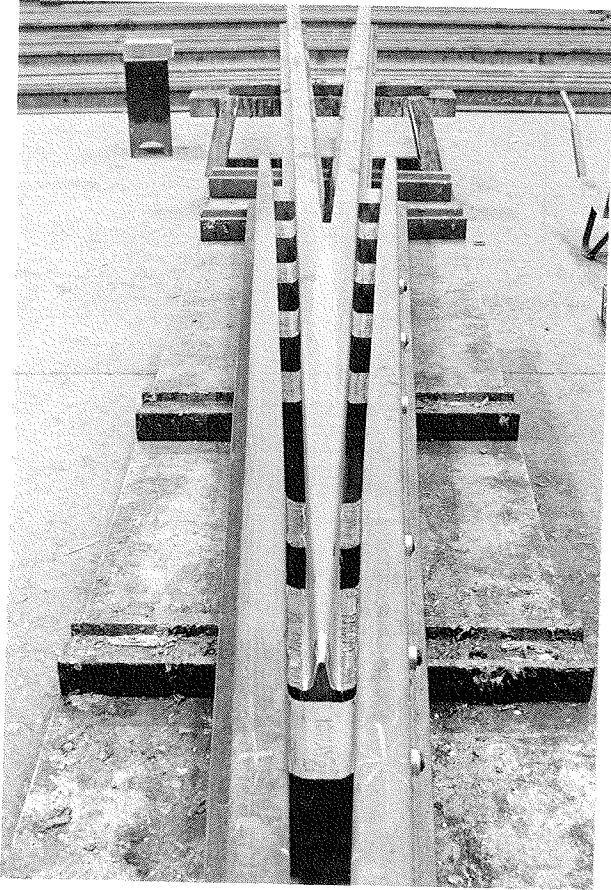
Part-welded crossing in BS.11 grade steel (90 kg/mm²).
